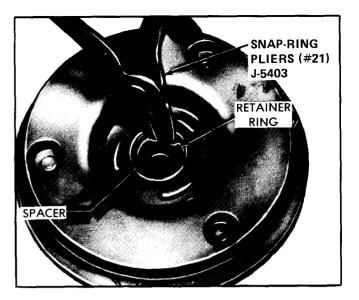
Removing or Installing Retainer Ring in Clutch Drive Plate
